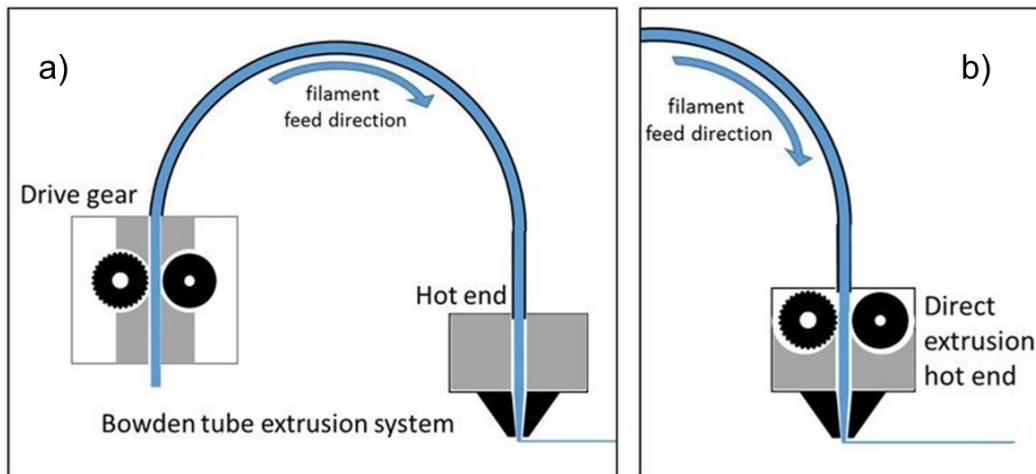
Extruder configuration: a) Bowden extruder, b) direct extruder [10].
